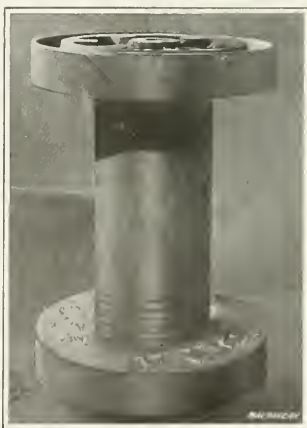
Same Drum as in Fig. 3, welding completed
